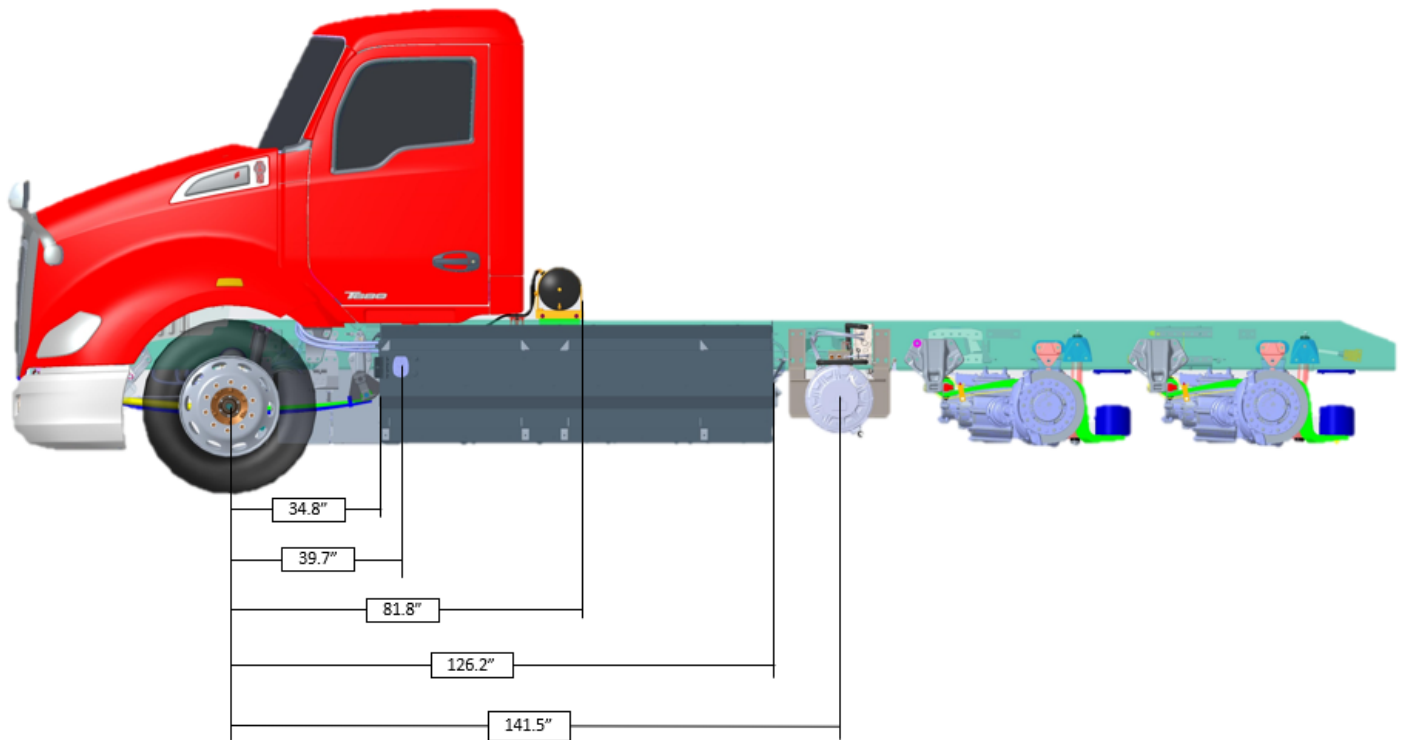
T680E Dimensions 216" (shown with optional ePTO)
